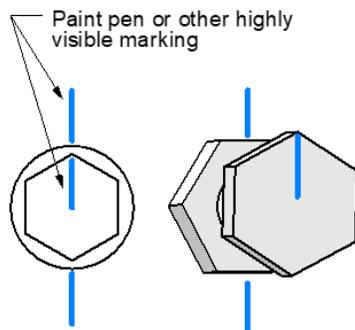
12 o'clock Position - Head of Adjustment Bolts
